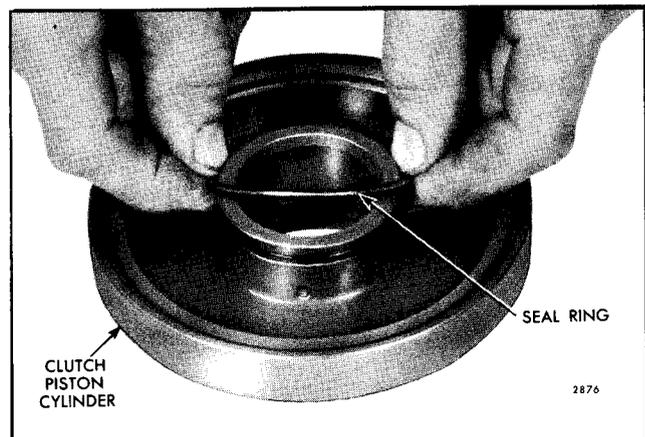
Installing Forward Clutch Piston Seal Ring in Clutch Piston Cylinder
